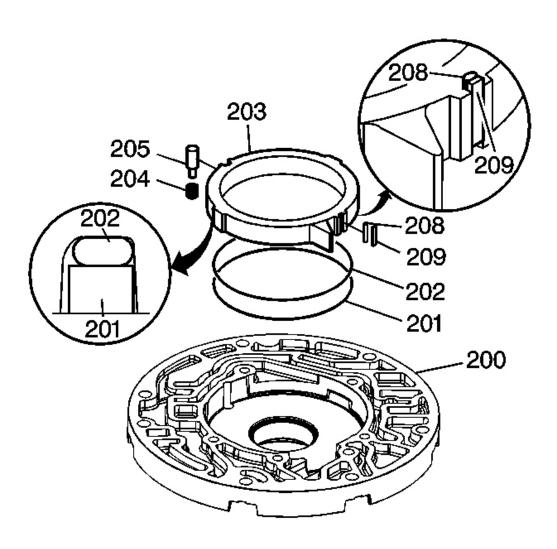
Identifying O-Ring Seal & Oil Seal Ring Courtesy of GENERAL MOTORS CORP.
